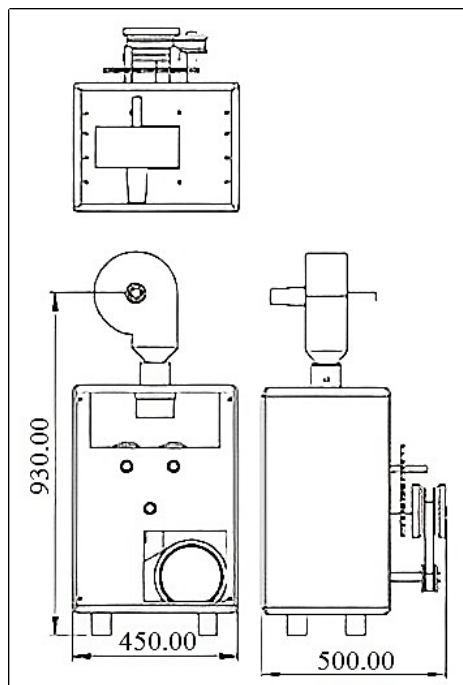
(a). CAD drawing of rice mill (orthographic) (unit: mm)
